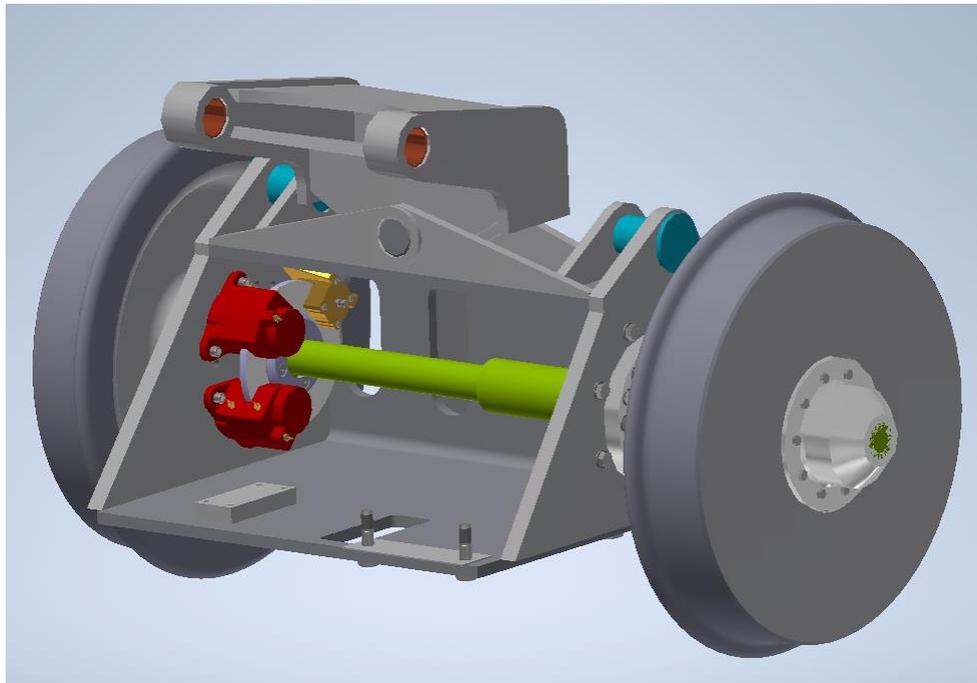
Dynamic brake calipers (red) and static brake caliper (brass colored) all acting on the same brake disc mounted to the drive axle (green).
